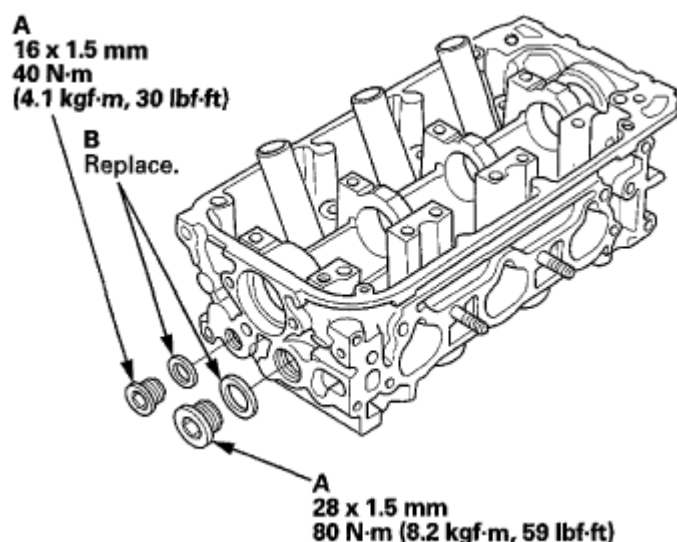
Identifying Cylinder Head Sealing Bolt And Washer With Torque Specification (Rear)
